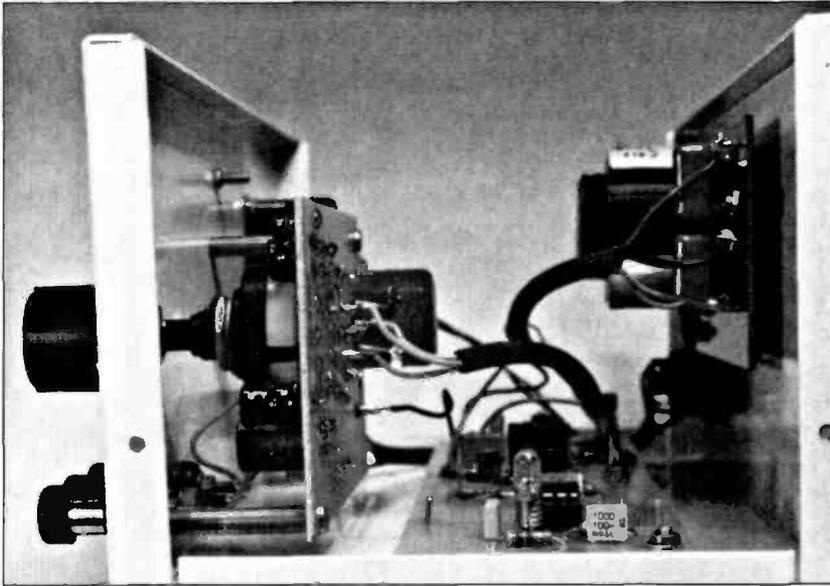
Photograph showing method of mounting bridge-board, stand-off mounts, inter-wiring and the power supply panel which is fixed on the rear casing.
